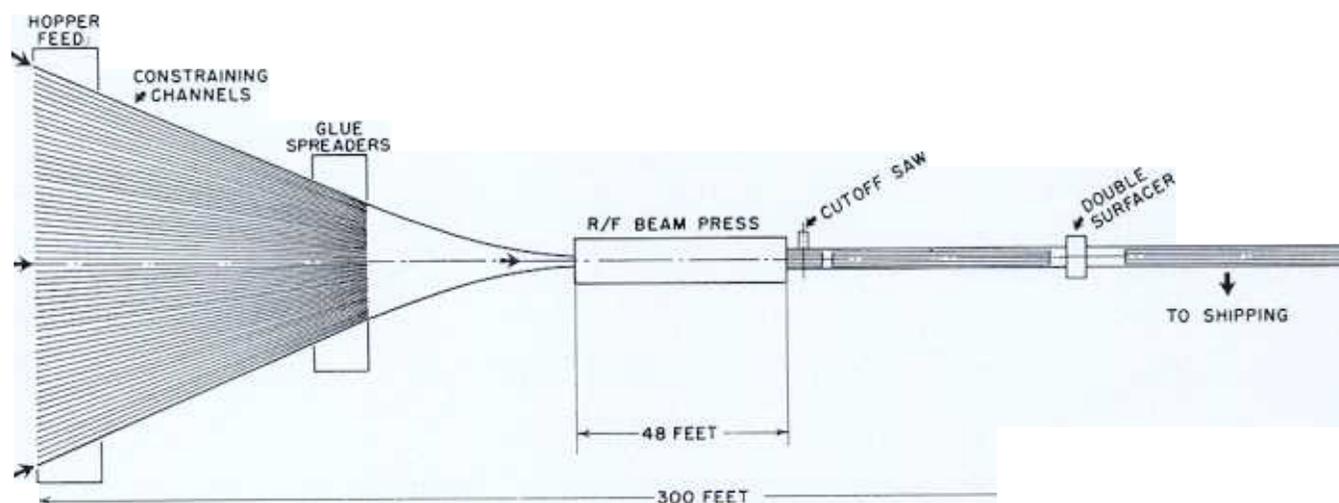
Flow plan through beam press: laminae travel on edge from 60 hopper-fed layup stations, each holding veneers of a particular stiffness; position of stations can be adjusted for suitable joint spacing in completed beam; during closed portion of press cycle, preheated end joints are partially cured in constraining channels (while stationary and under pressure); glue spreaders apply adhesive to both sides of each lamina, with provision for dry lines where desired; beam is cut to length, passed through a double surfacer and offloaded to shipping.
